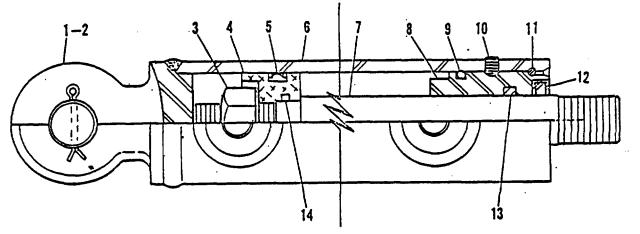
HYDRAULIC CYLINDER FOR SPRAY BAR AND FIFTH WHEEL
